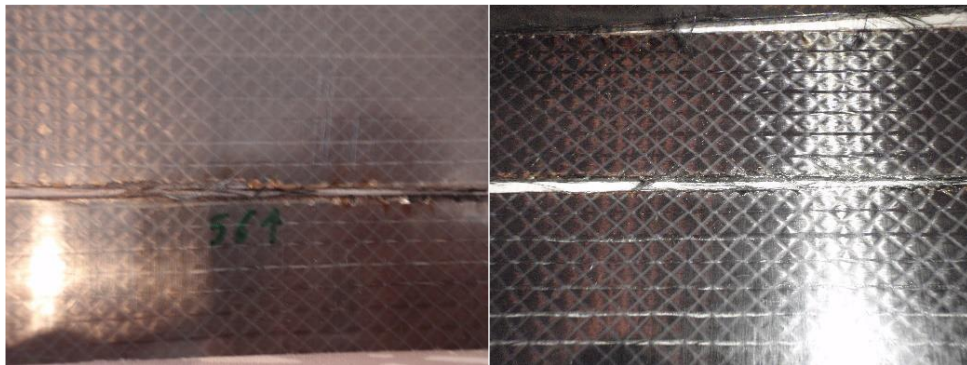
Images of top side laser cut surfaces of tests 56 (left) and 57 (right).
